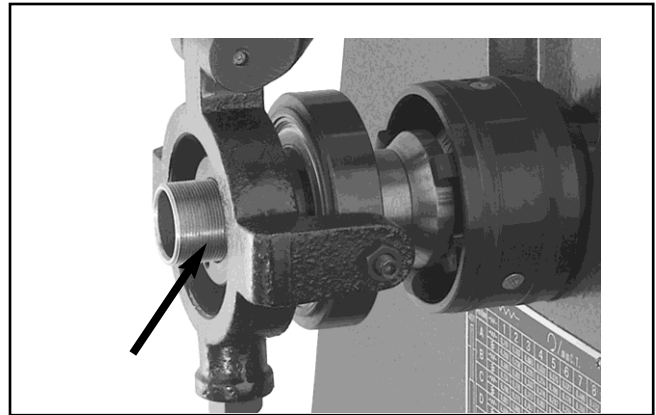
Location to rotate draw tube to remove or replace 5-C collets.
